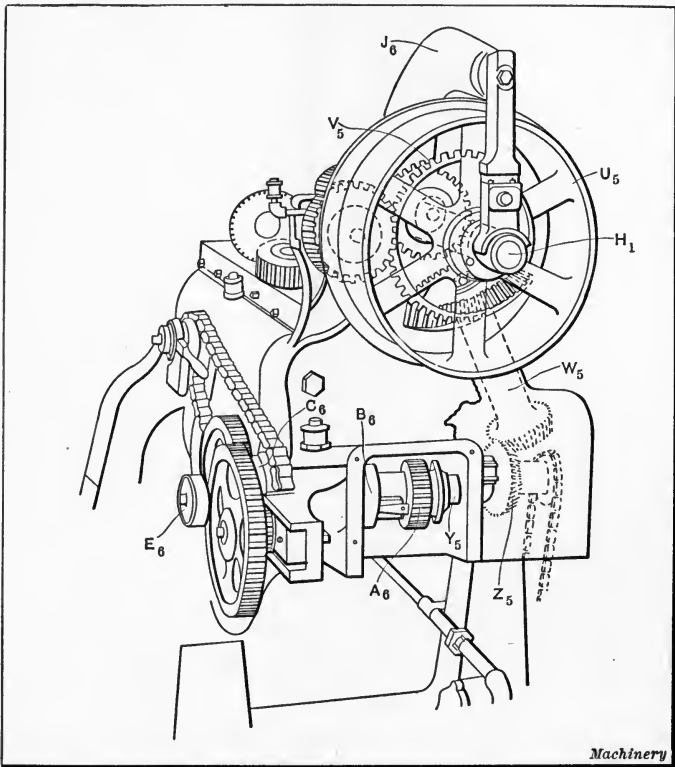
End View of Machine showing Speed-changing Mechanism for Camshaft
